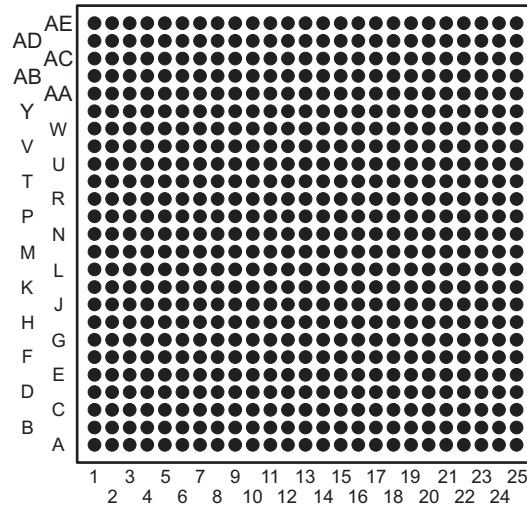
CZH and GZH 625-Pin BGA Package (Bottom View)
